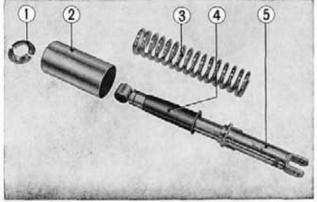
① Spring seat stopper ② Rear cushion upper case ③ Rear cushion spring ④ Rear cushion spring guide ⑤ Rear damper unit
